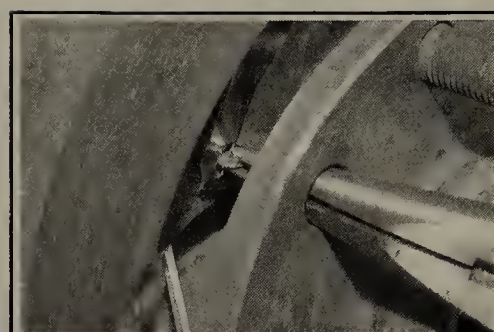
Place the hold-down spring over the pin, and while holding the spring in place with a screwdriver, use needle-nose pliers to turn the pin to the secured position
